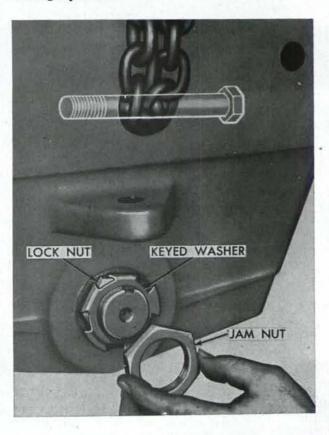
Support front of Heavy Duty Industrial tractor with chain loop and bolt, as shown, when removing front axle or pivot pin. Note method of locking front end of axle pivot pin.
